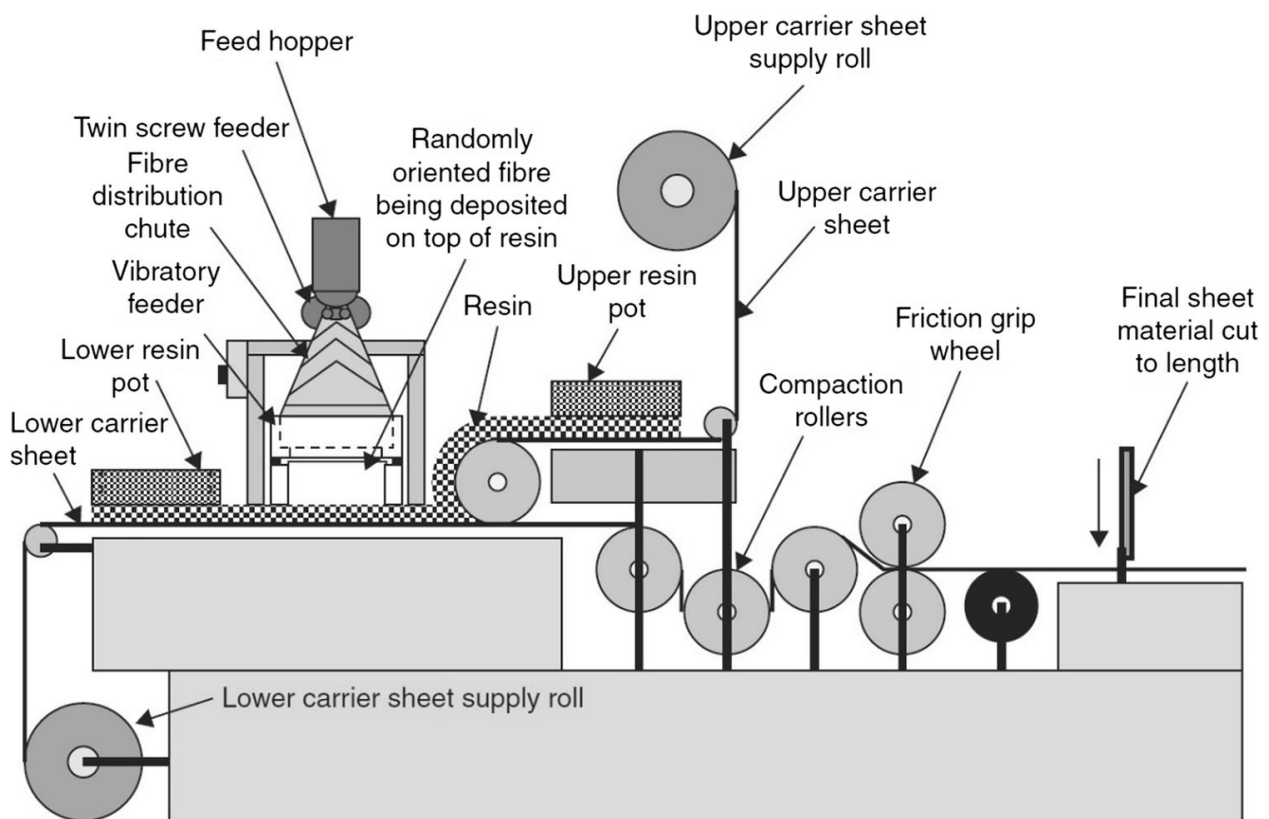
Process flow illustration of the sheet molding technique for composite manufacturing (Dai & Fan, 2014)
